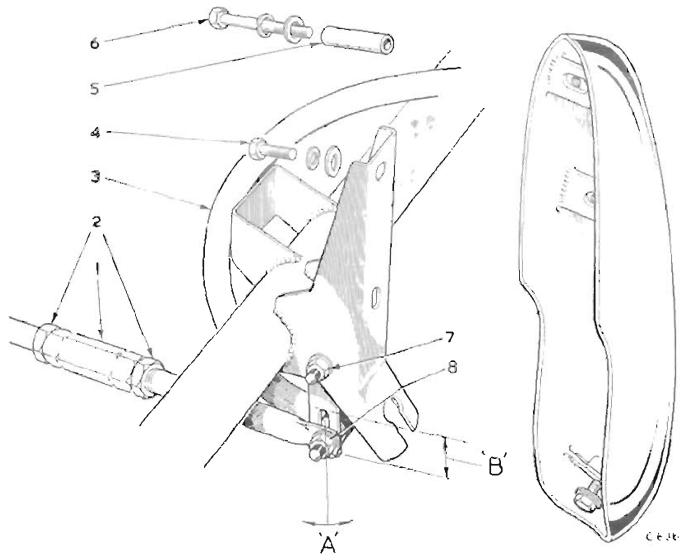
Bonnet adjusting points (Herald 1200, 12/50 and Vitesse)
